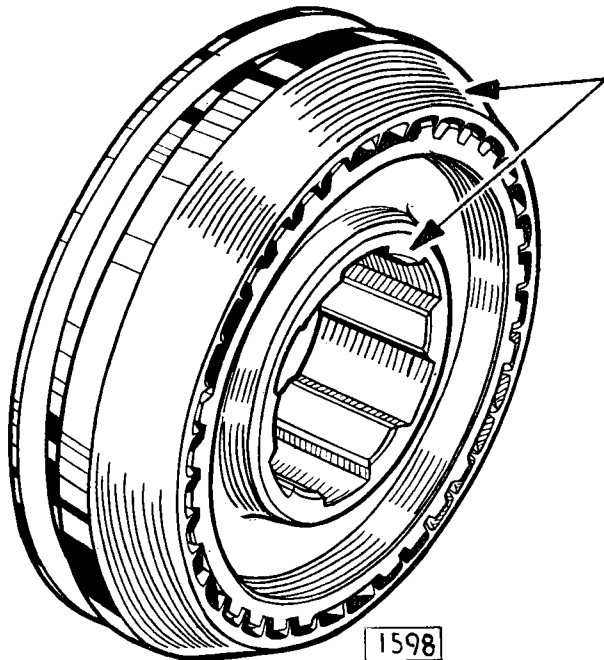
The wide chamfer end of the operating sleeve must be fitted to the same side as the large boss on the synchro sleeve
